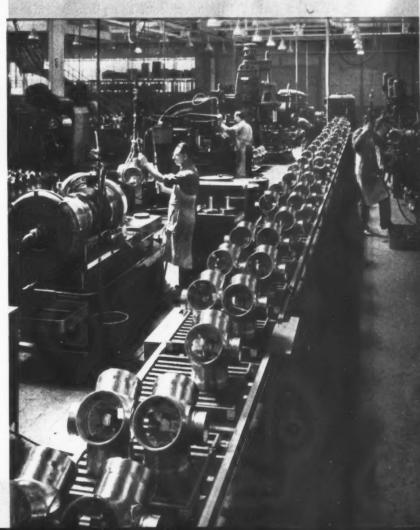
The First Machining Operation in the Manufacture of Steel Propeller Blades Consists of Edgemilling the Camber and Thrust Plates
